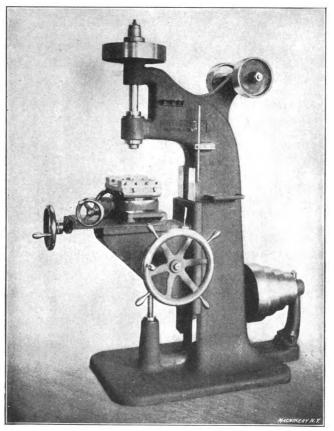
The Pratt & Whitney No. 2 Die-sinking Machine
